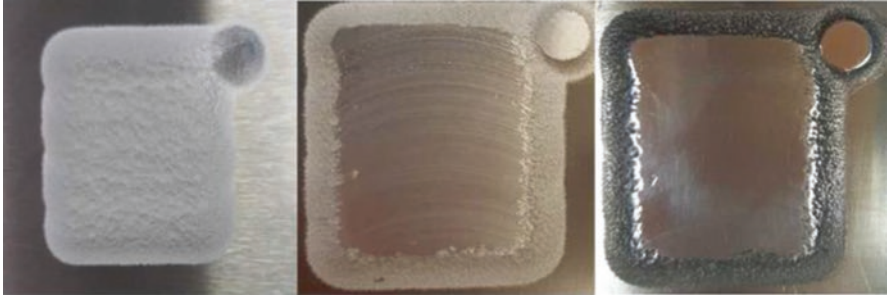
Aluminum cold spray coating, showing as-sprayed, after face milling and after polishing
